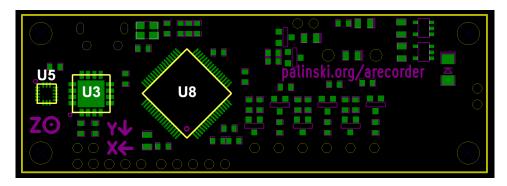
Location of important components on bottom side of Arecorder's PCB board.
